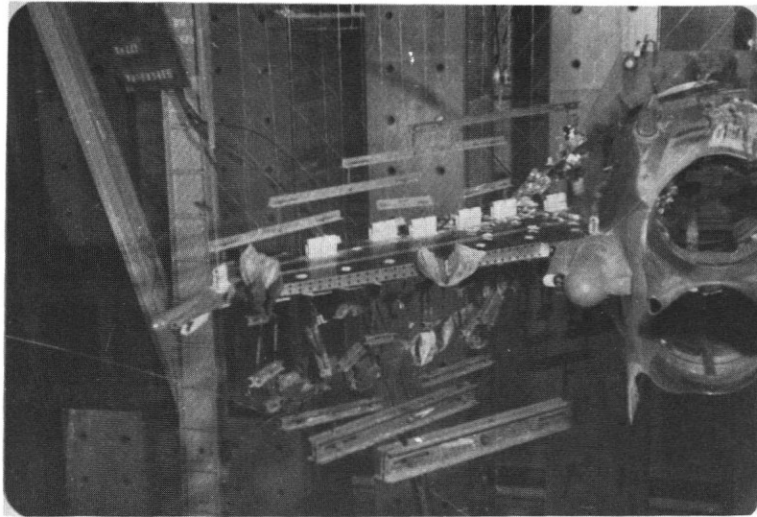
Composite Torque Box Fixed on Rear Fuselage
